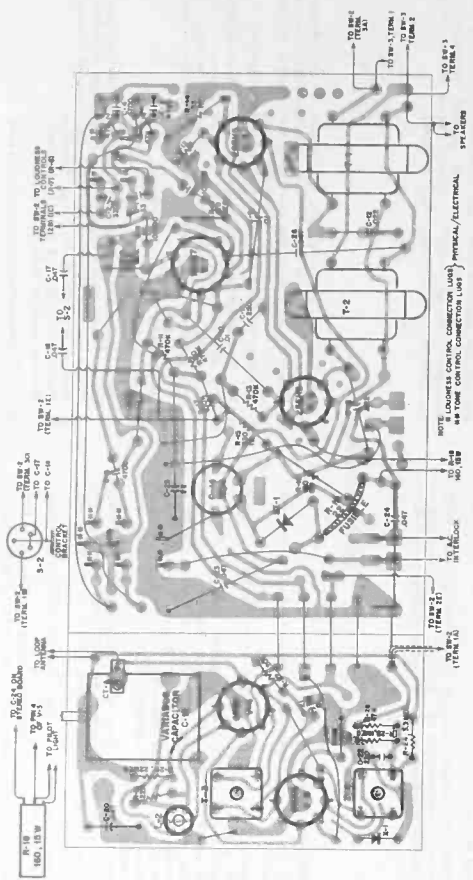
PRINTED CIRCUIT CHASSIS 120455B
